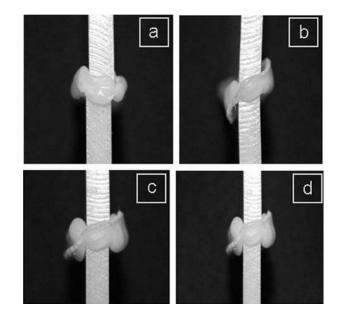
d. General view of vibration welded joints in polyethylene HDPE.
